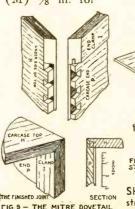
THE MITRE DOVETAIL AND ITS FINISH
